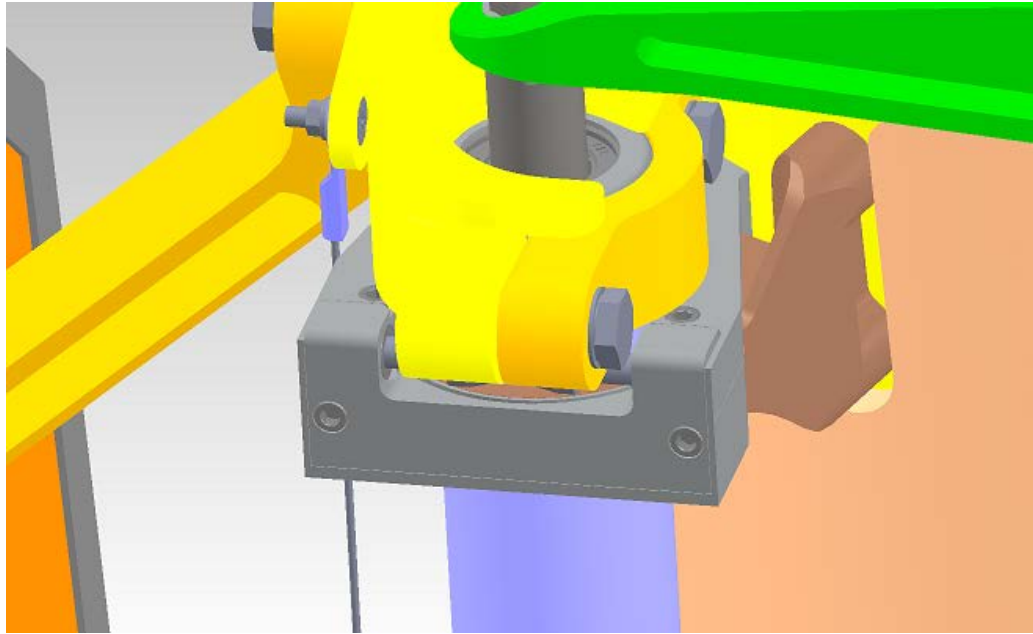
AVASS Roller Bearing Design for Top Brackets V2.0 Top Angle View
